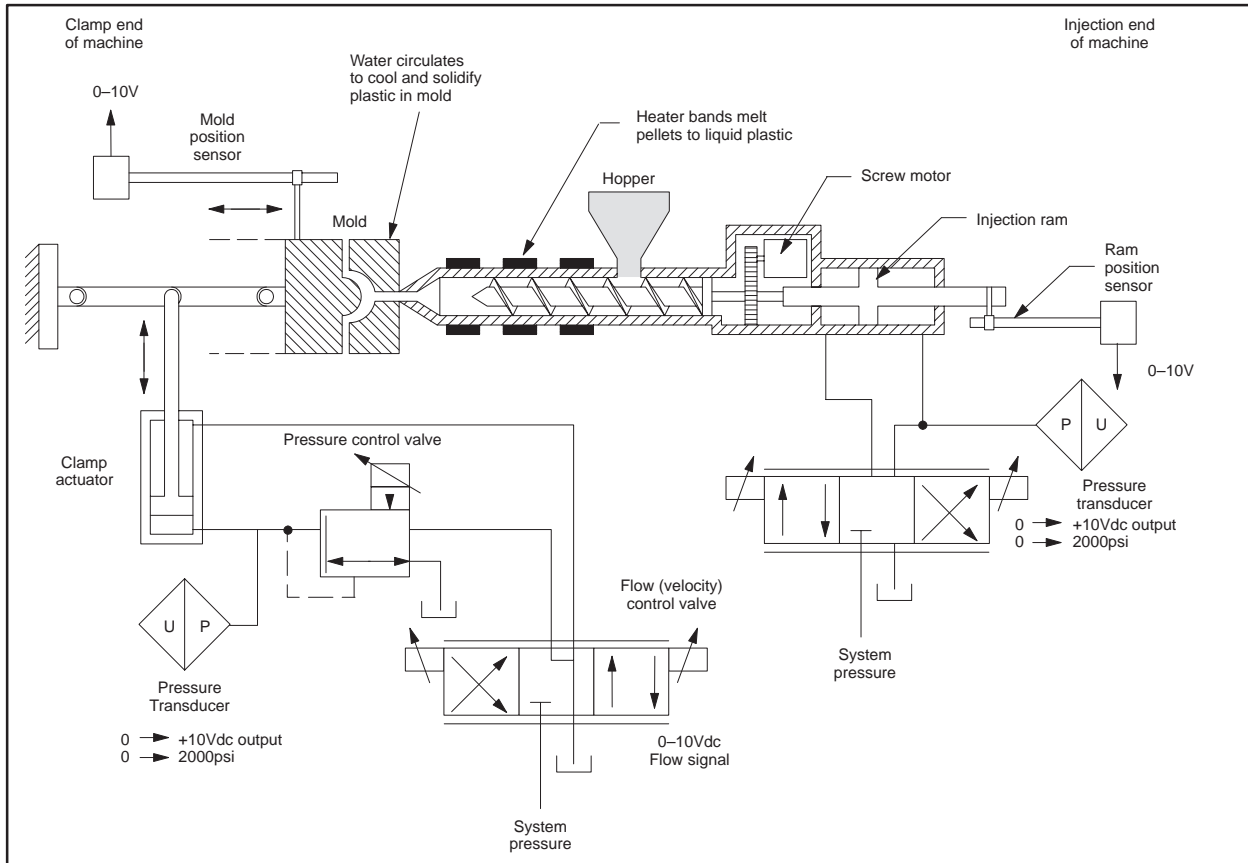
Plastic Injection Molding Machine Control Points, Machine Configuration 3
